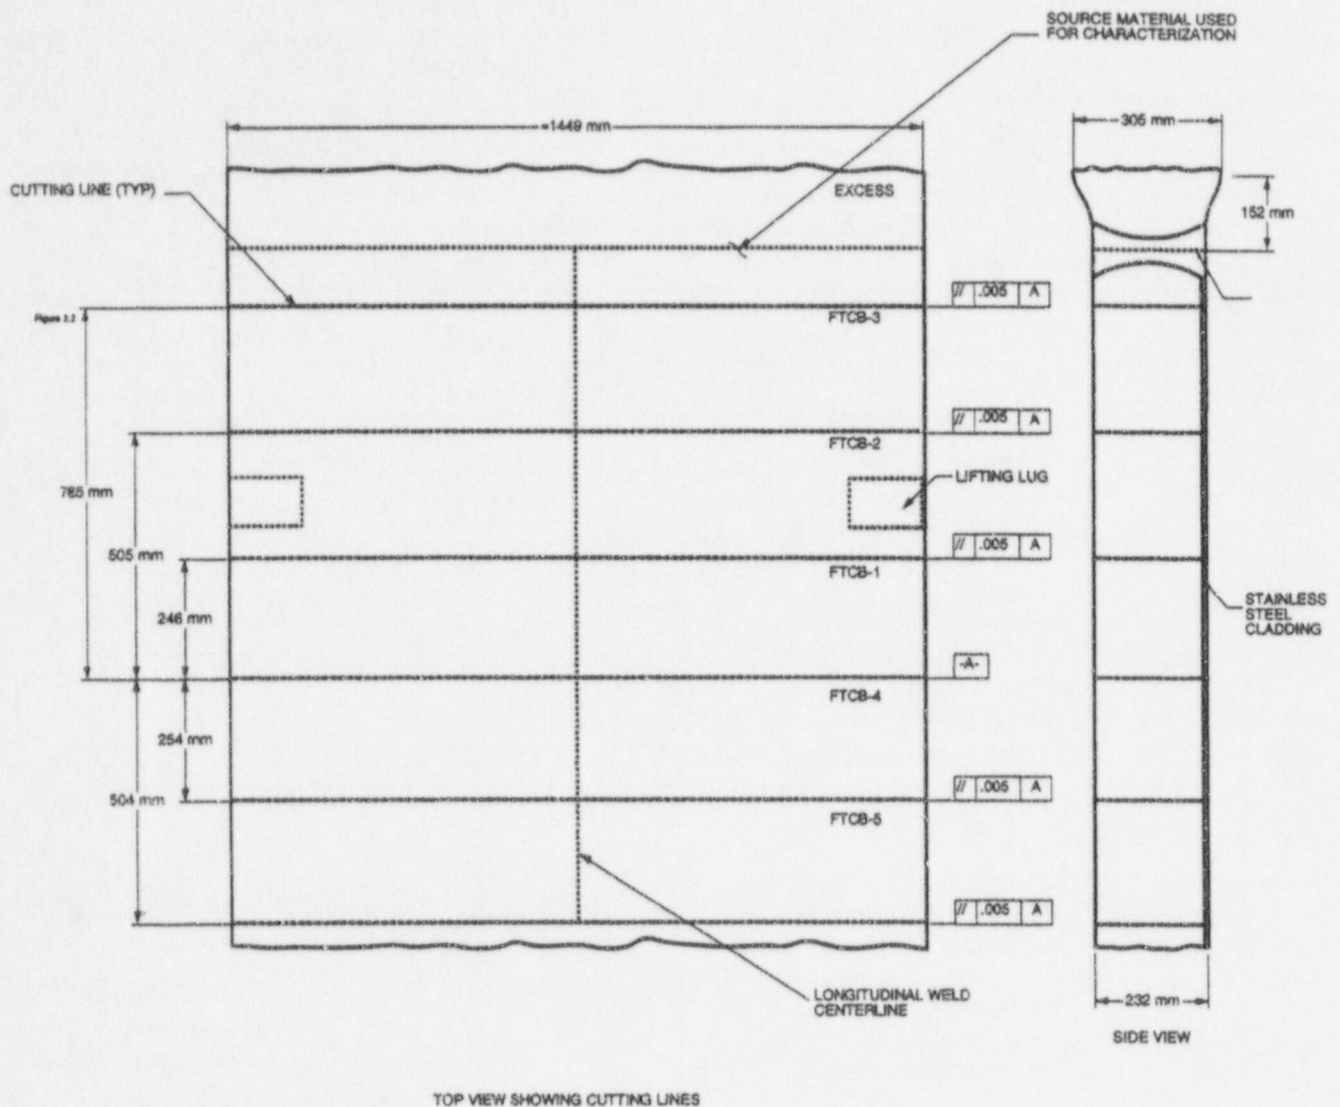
Cut-up plan for full-thickness clad beam blanks.
